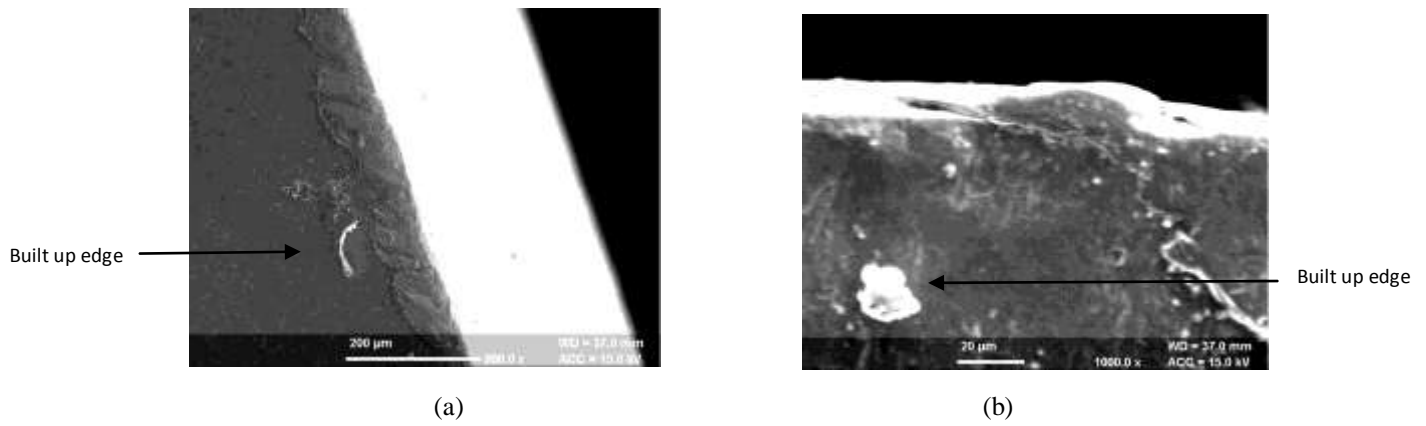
SEM micrographs showing built up edge on the tool flank face
